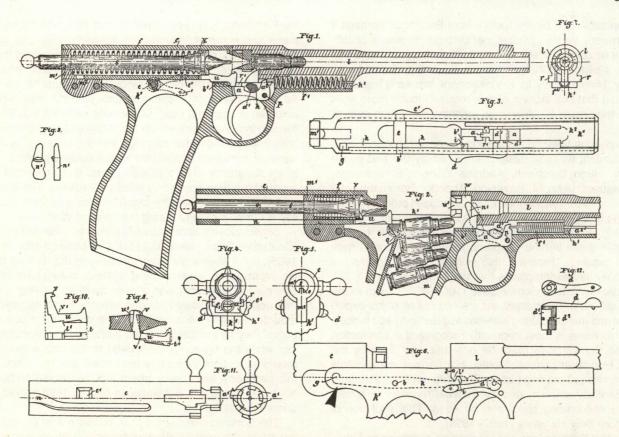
British patent drawing (1,934 of 1898) for the Schwarzlose 1898 Standart pistol. Note that the bolt handle has been eliminated in favor of retraction "ears" at the rear of the bolt. The bolt hold-open device and linkage to the lever are indicated by the arrow. Simple sear and trigger linkage are used to hold and release the striker. (*British patent*)
